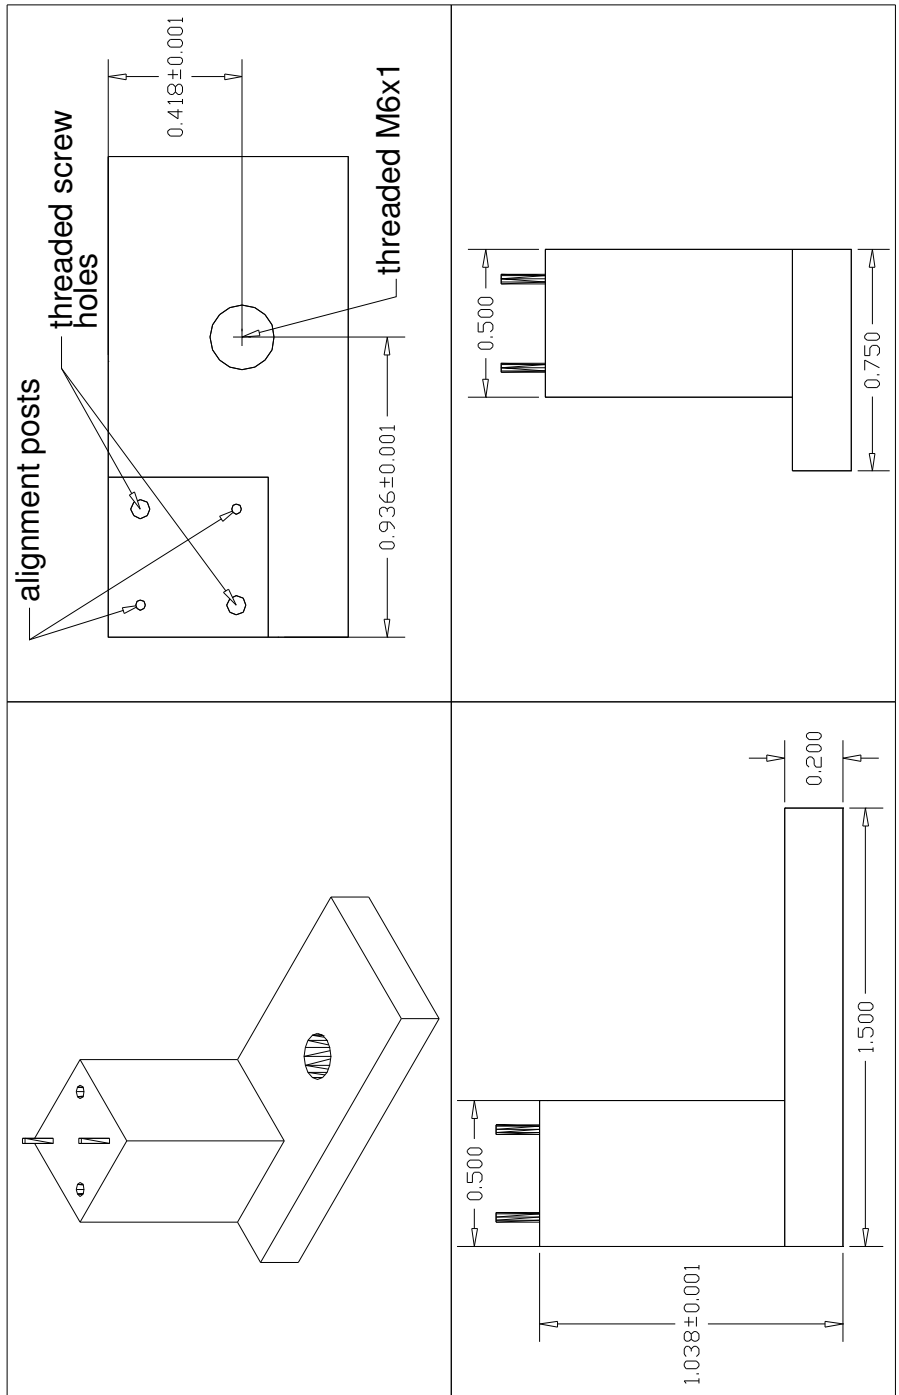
Dimensioned base of mount for hyperhemispherical lens. Dimensions are in inches.
